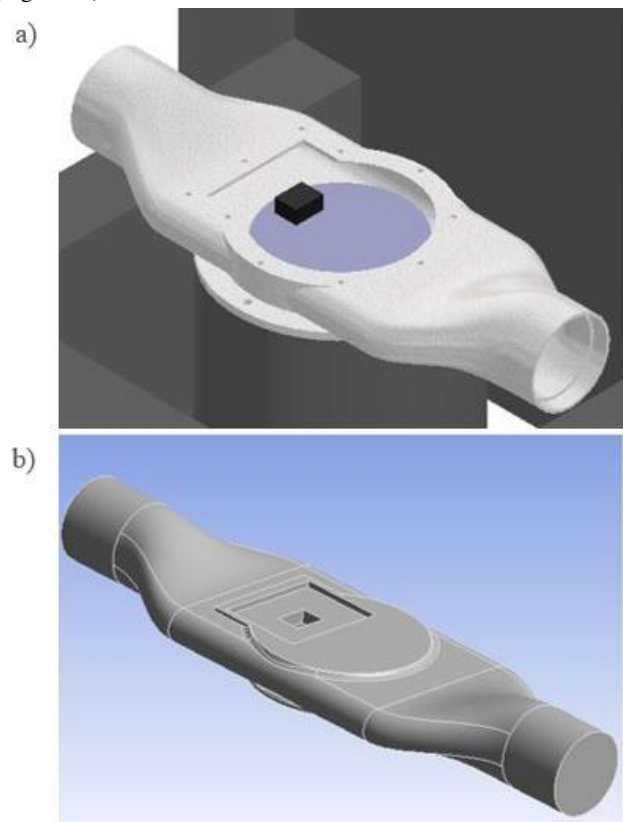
a) CAD assembly (not showing the pad holder) and b) the extruded volume for the CFD simulation.
